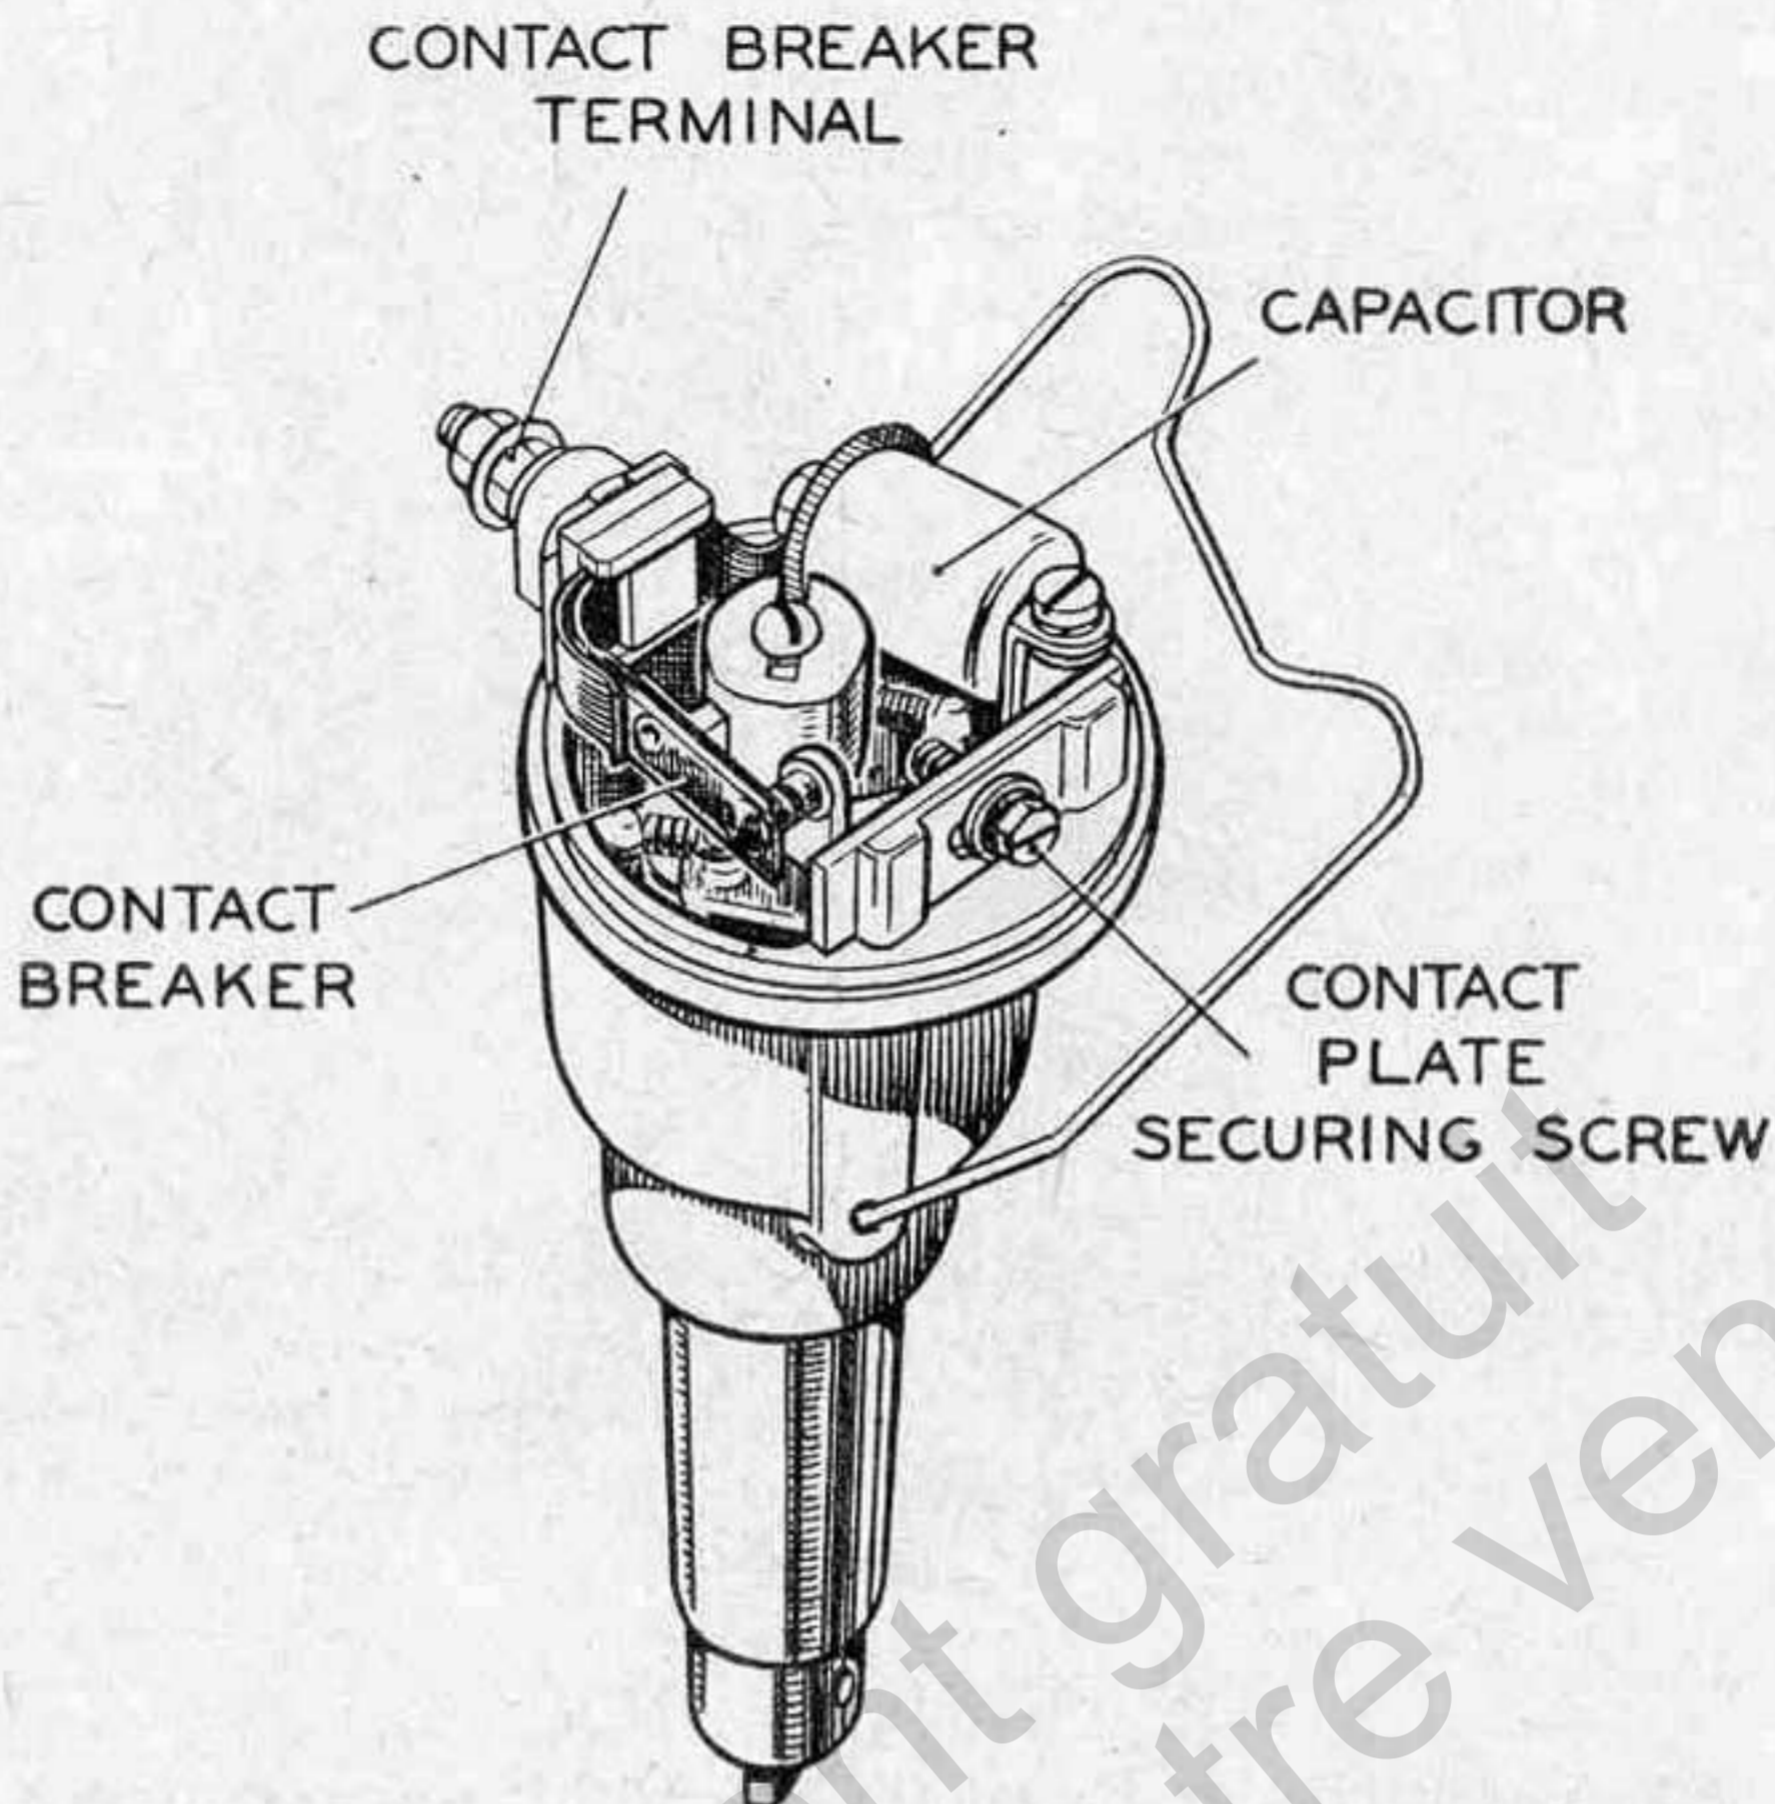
Contact Breaker and Automatic Advance Unit, Model 15DI, with cover removed.
